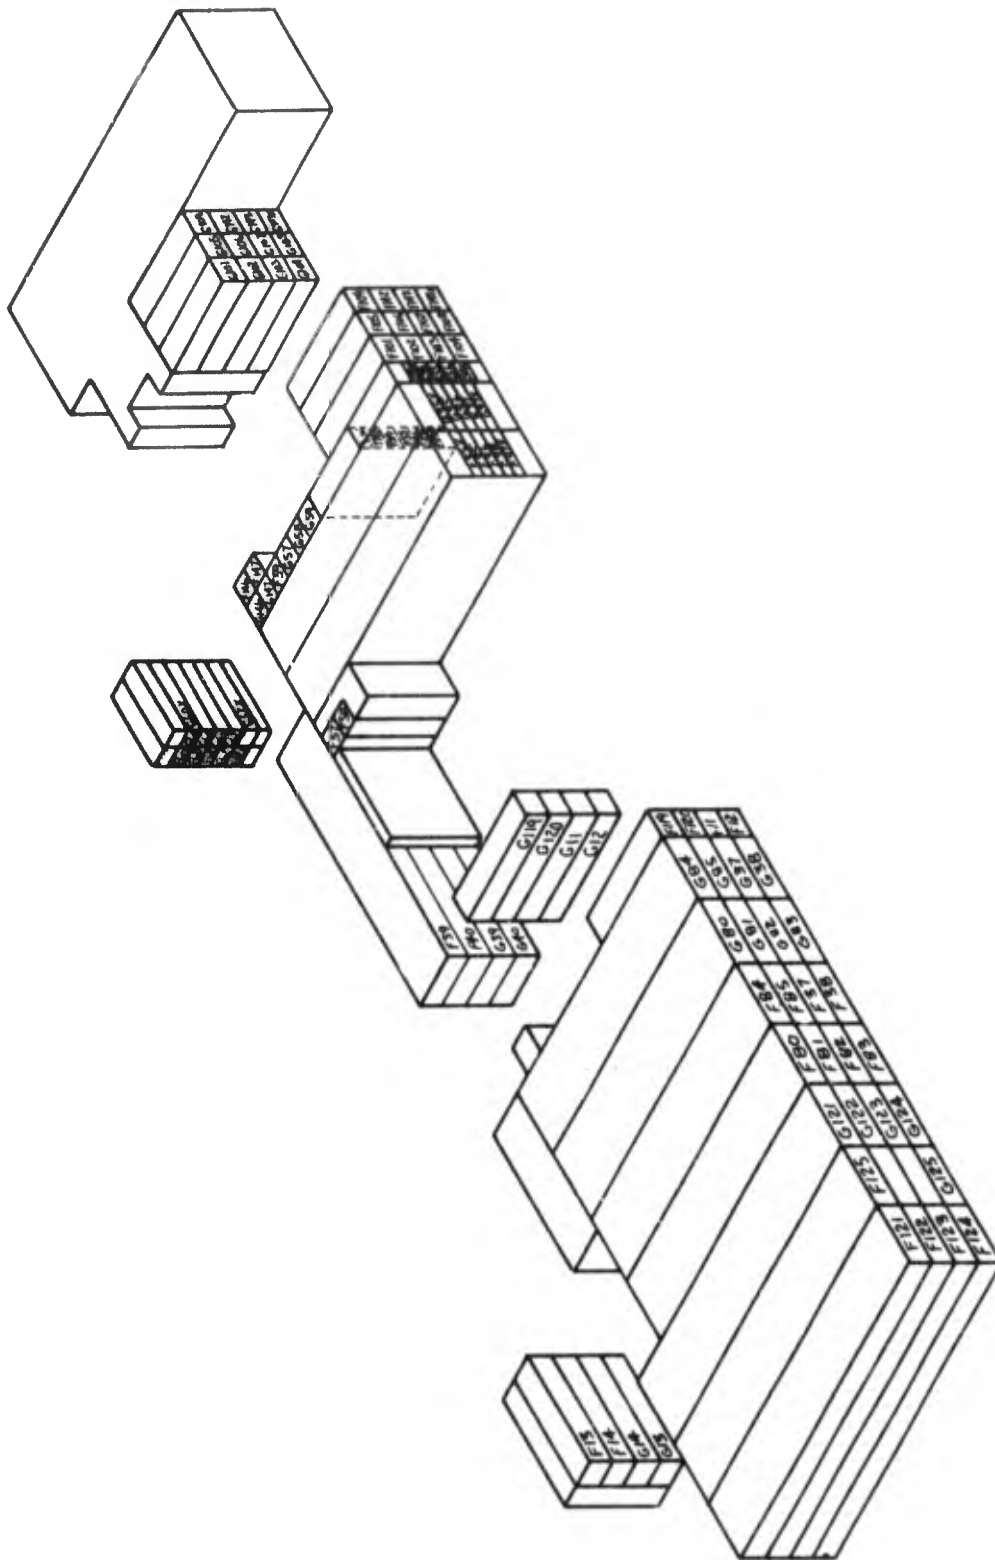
9Ni-4Co-0.45C Billet Cutting Diagram, Heat No. 3931120
